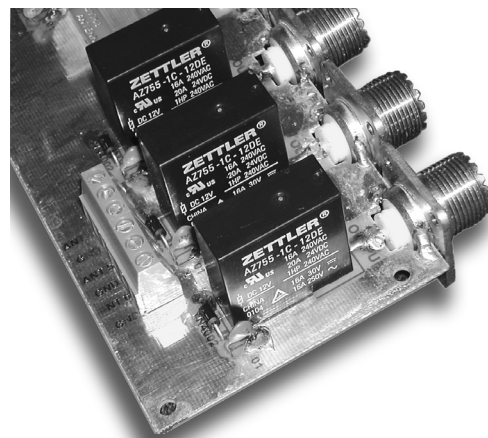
Connector flanges are soldered to the board's ground plane top and bottom. The ground ends of D1-D6 and C1-C6 are also soldered top and bottom. The relays have two pins each for the contact connections. Solder all pins and install eyelets supplied with the FAR Circuits board to ensure good connections for the relay common and normally closed pins.
